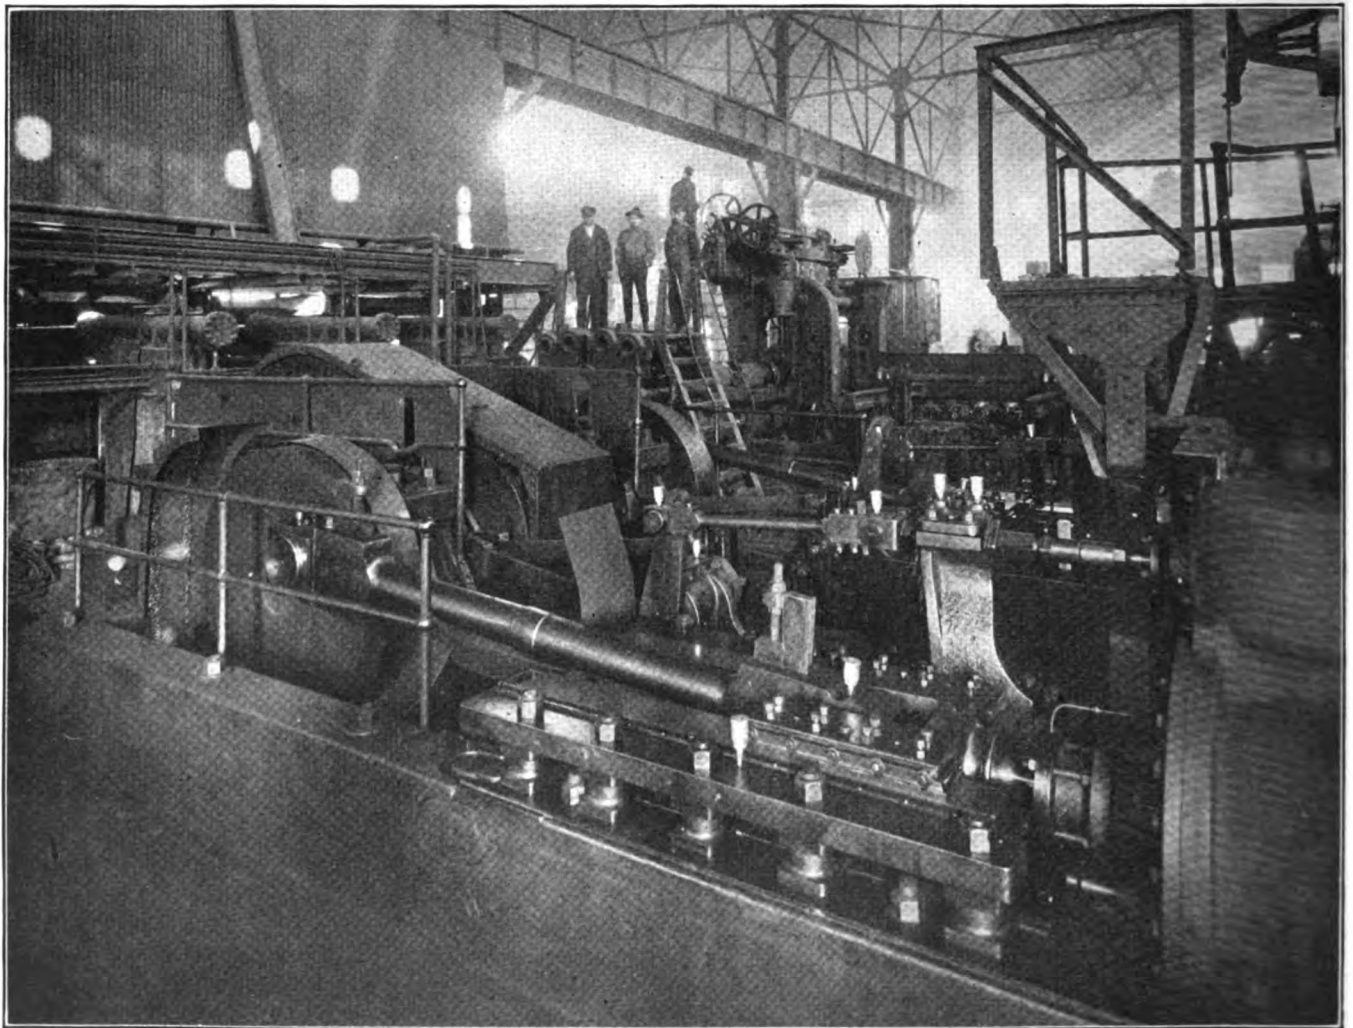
View of 26-in. x 48-in. double reversing engine driving the new blooming mill—with mill showing in background.
